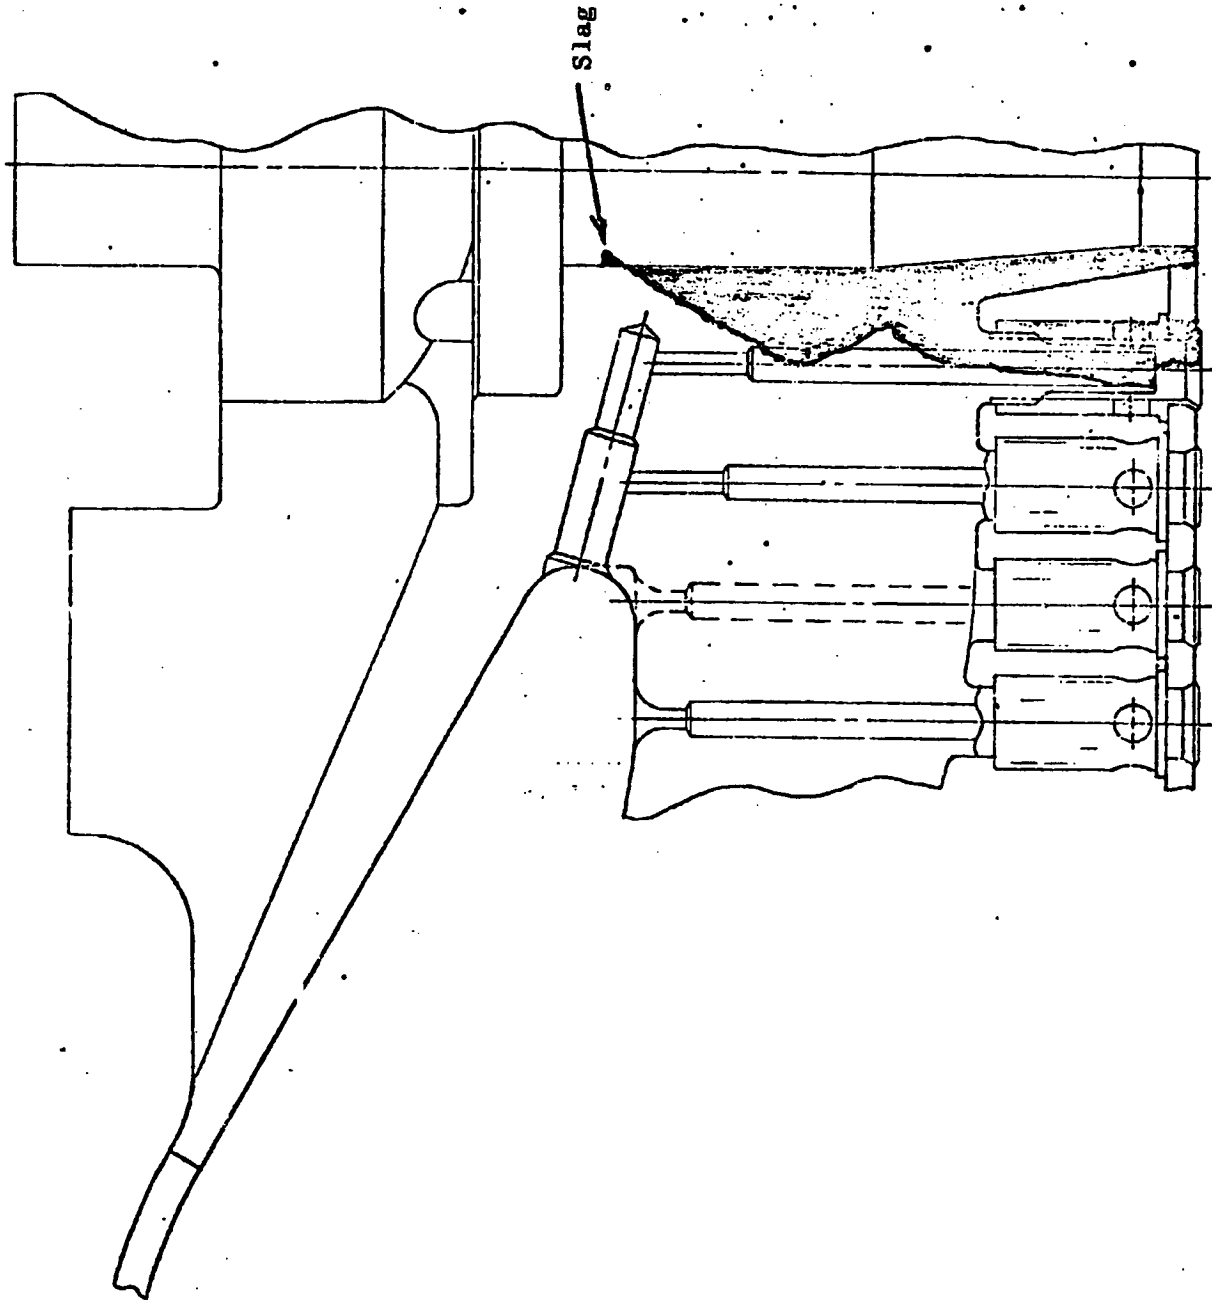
Engine J016-1, Test 313-041, Posttest Injector Condition
